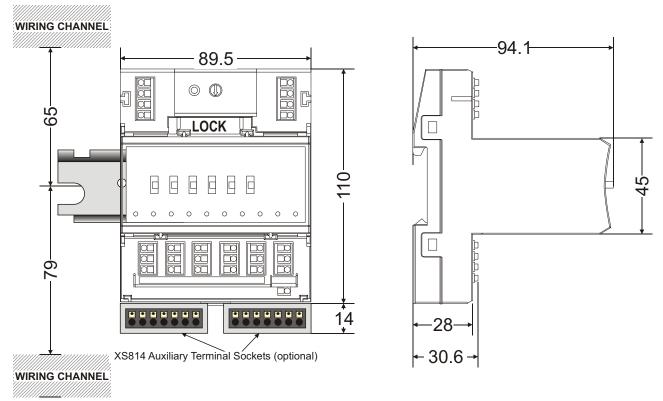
Excel 800 I/O Modules (example shows Manual Overrides), incl. Terminal Socket, outside dimensions (in mm)
